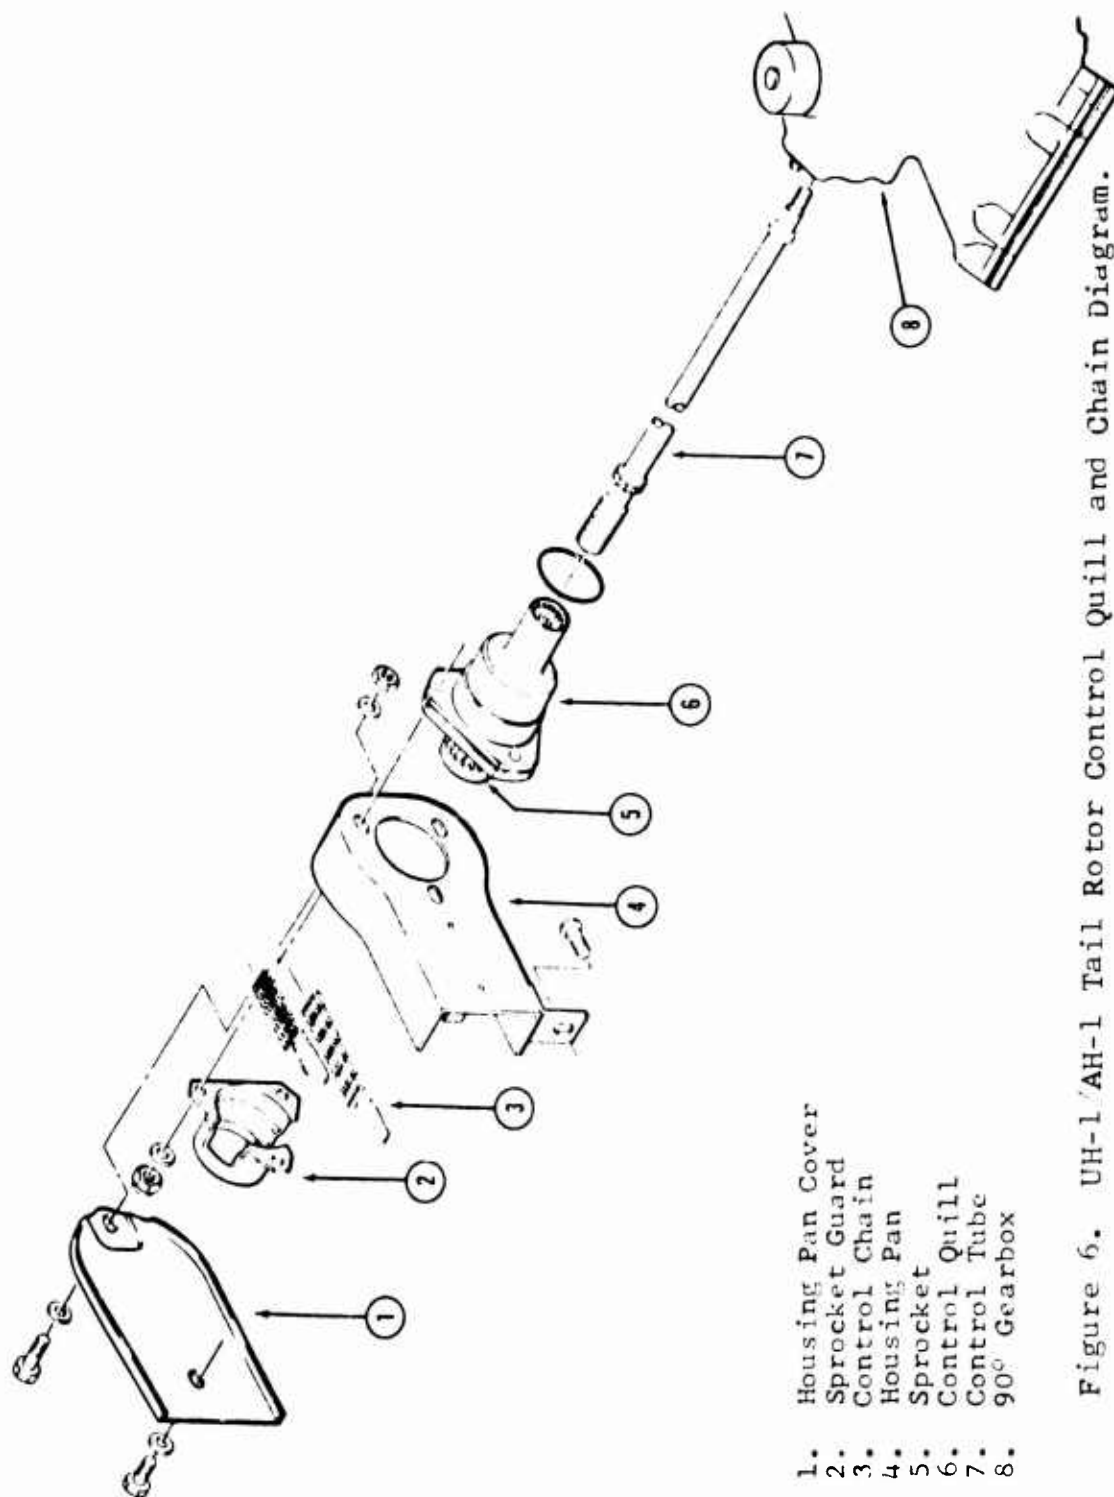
UH-1/AH-1 Tail Rotor Control Quill and Chain Diagram.
